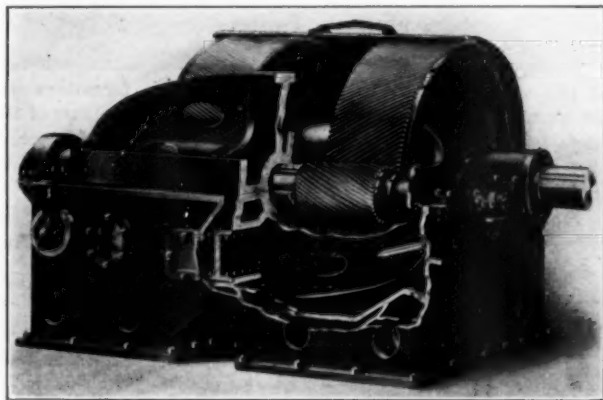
6000-HP. EXPERIMENTAL GEAR
